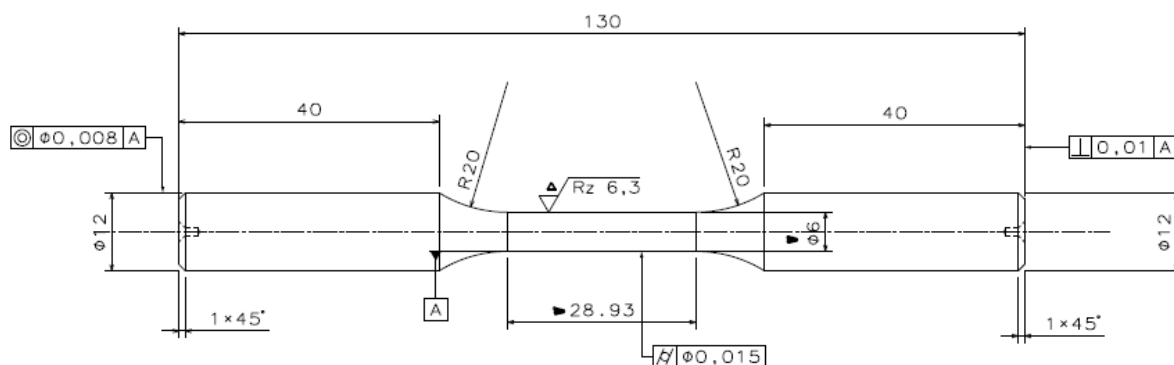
Rotating bending fatigue testing sample per (BS ISO 1143:, 2010)
